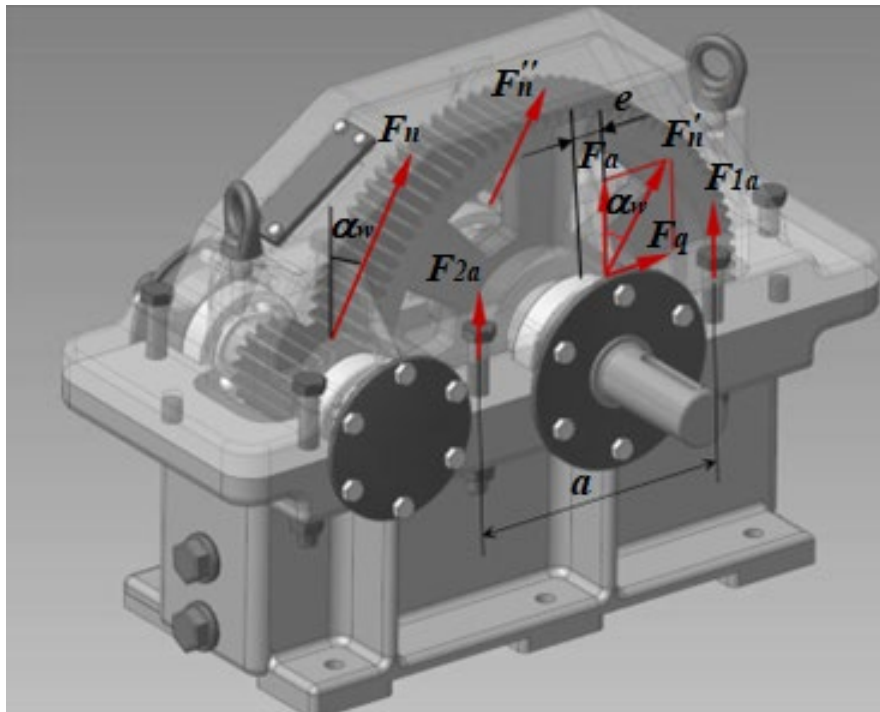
Design scheme of the housing-cover connection of a parallel-shaft reducers
